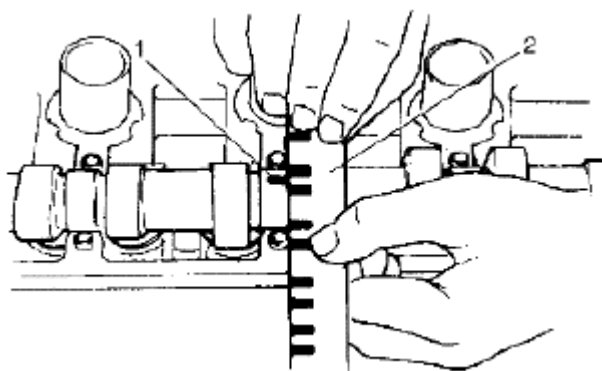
Identifying Tightening Sequence Of Camshaft Housing Bolts
